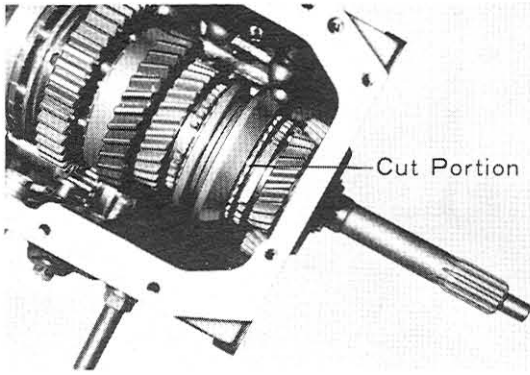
Synchronizer Gear V5066 Cut Portion
